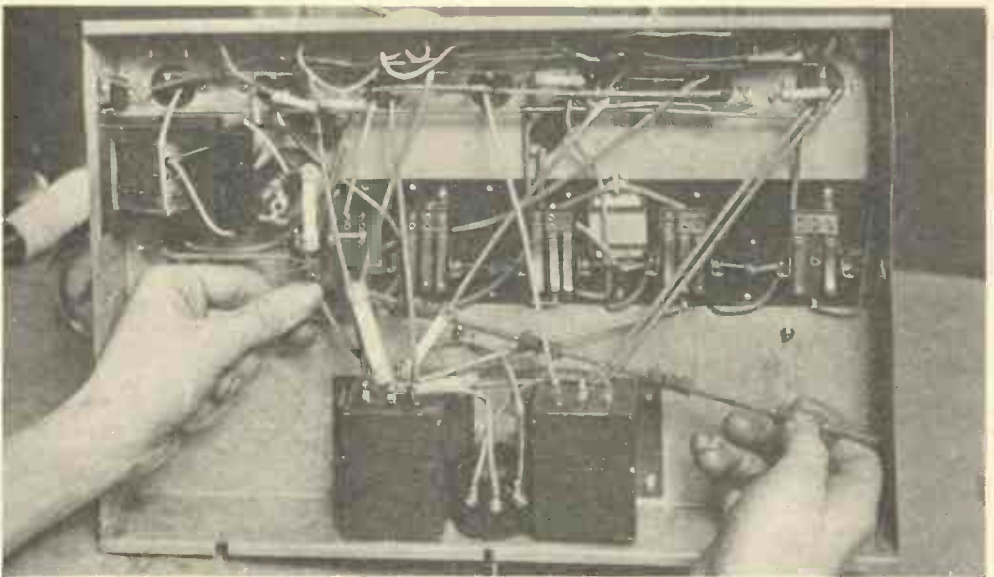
REMOVING THE WAVE-CHANGE SPINDLE.
